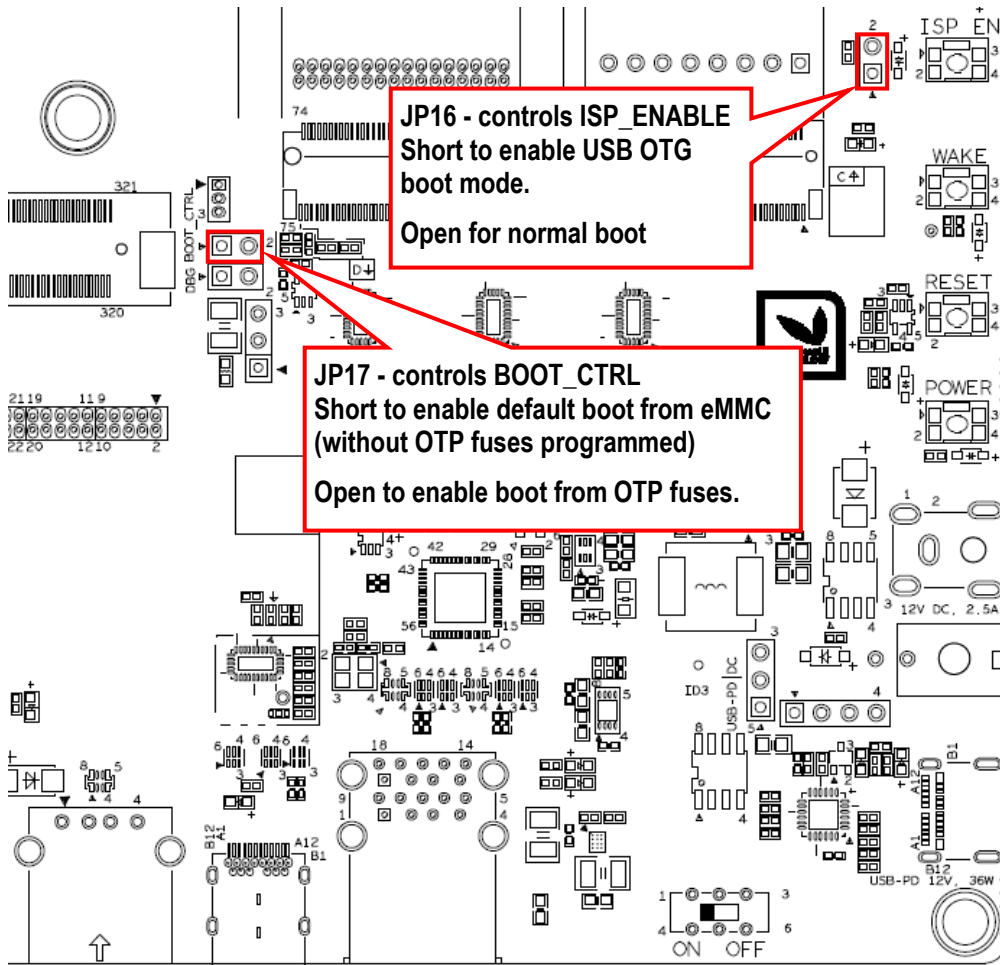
SOM Carrier Board rev A, Boot Control Jumpers
